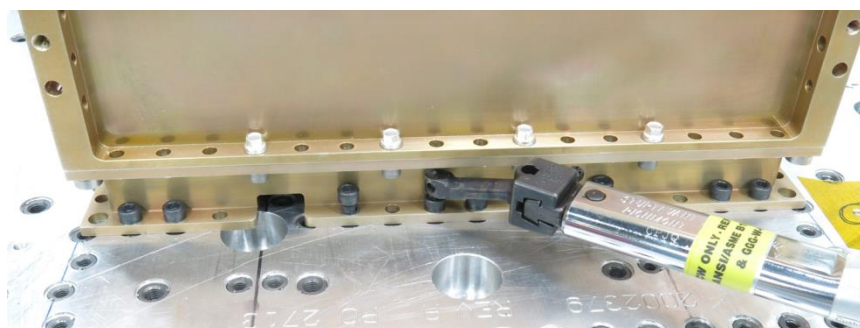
Using reduced clicker head wrench to torque fasteners via -Z face
